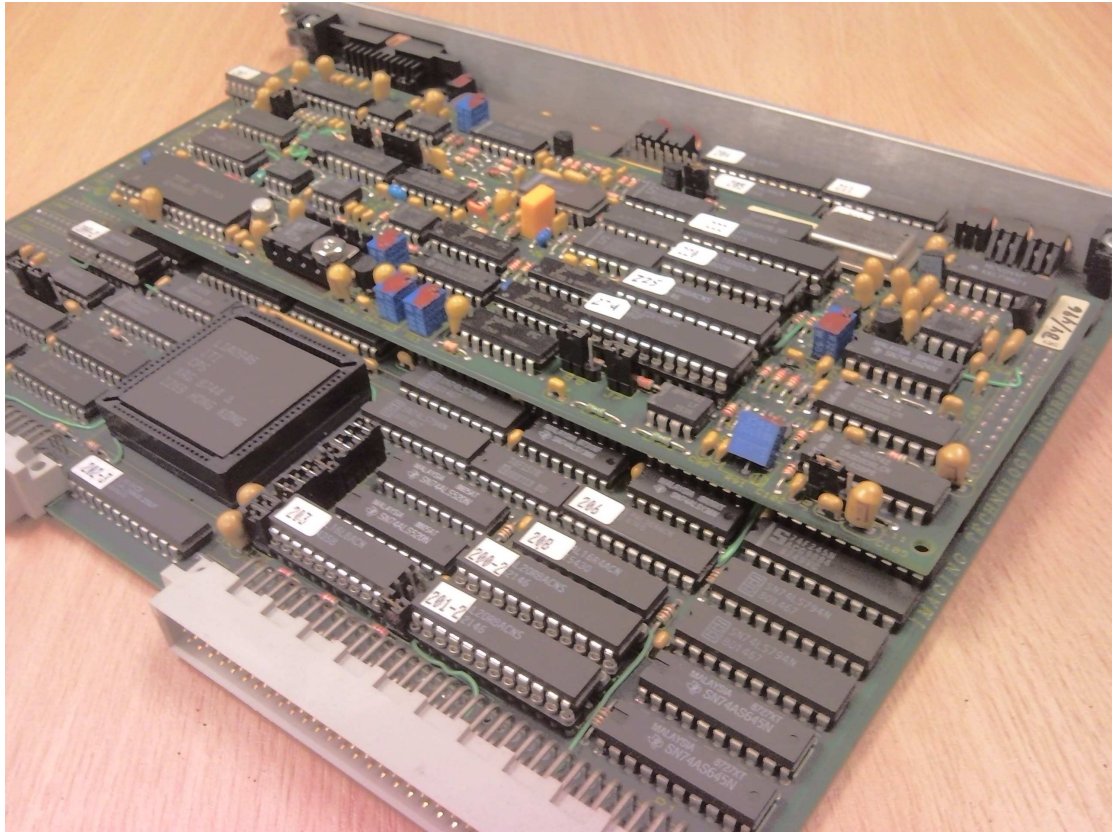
Heurikon HSE-10R board 1 rear three-quarter view
